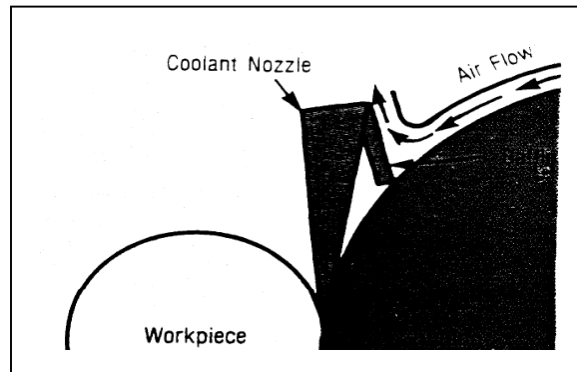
Scraper used to break up air boundary layer ahead of the grinding zone
